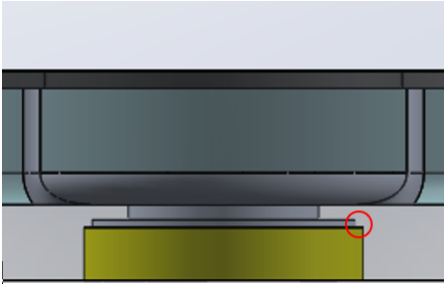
Schematic side view of the attachment of the bearing (yellow) and the housing. With the red circle, the edge to prevent contact between the inner ring of the bearing and the housing, is shown.
